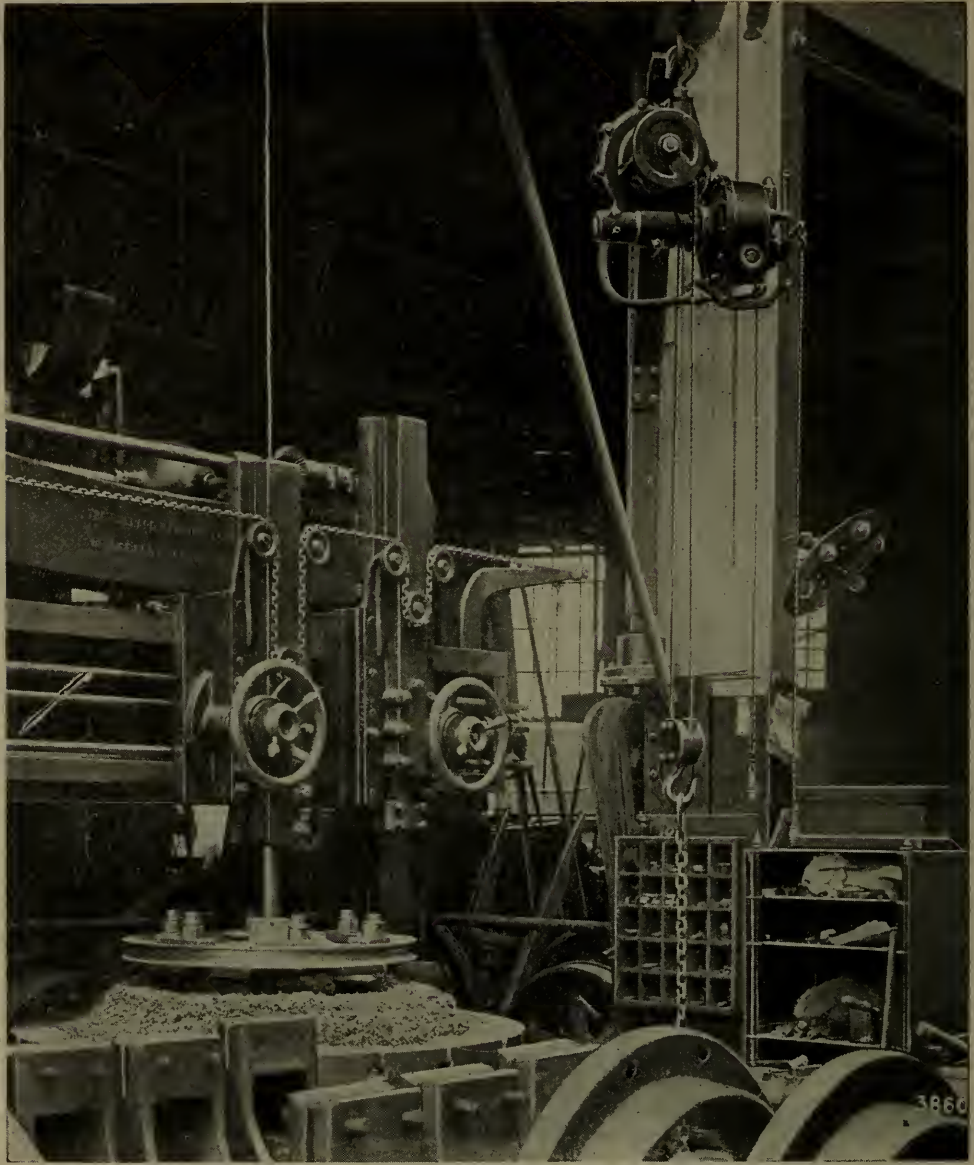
Air motor hoist assisting machine tools in the Morse-Williams Plant, Otis Elevator Co., Philadelphia, Pa.
